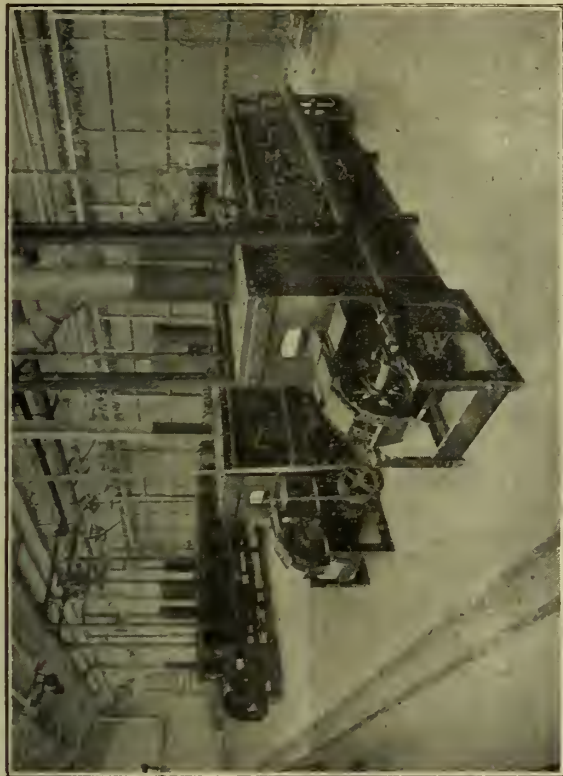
FOUR BELT-DRIVEN CONVEYOR FURNACES FOR HEATING BRASS BILLETS.
